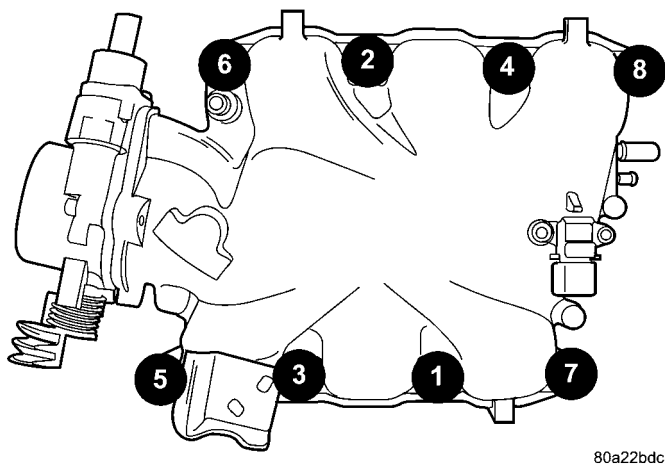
UPPER MANIFOLD TIGHTENING SEQUENCE
